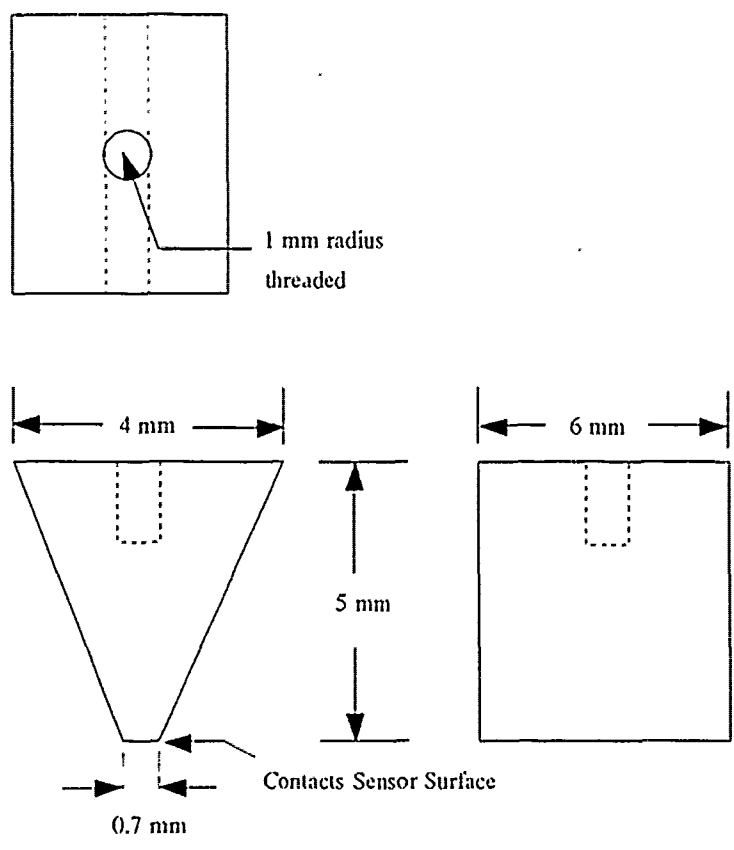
Representative Test-Load Shape - A Sharp Edge.
